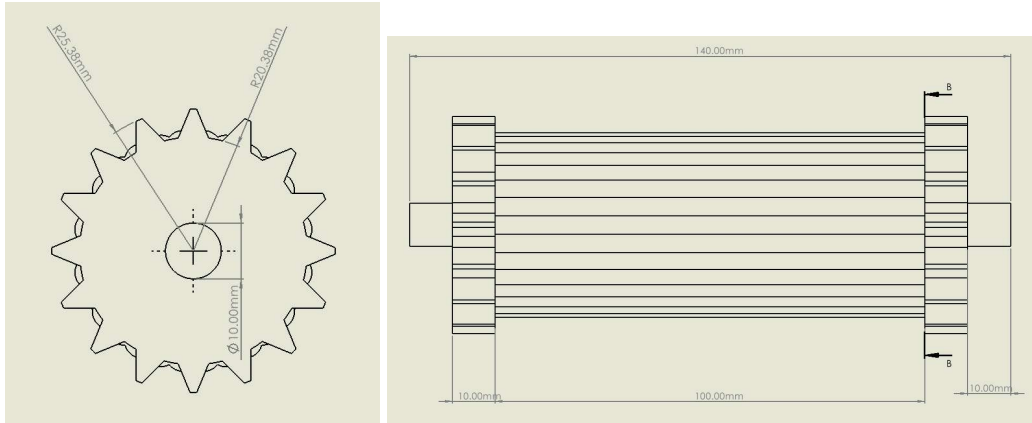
Dimensioned Front and Side View of Roller With Horizontal Bumps
